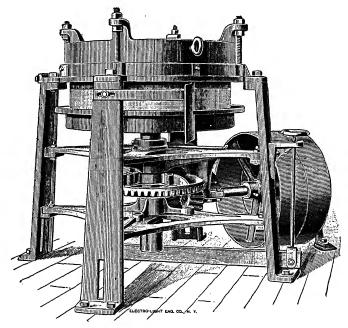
GRINDING MILL FOR LEAD AND HEAVY PASTE.
